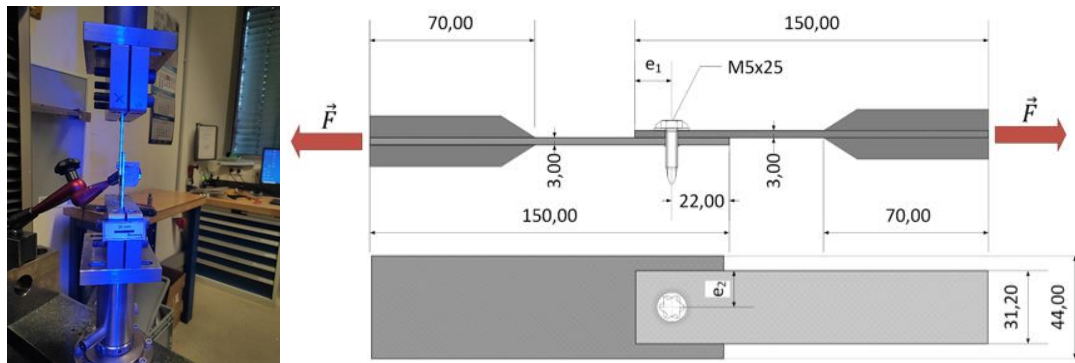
Test arrangement (left) and specimen (right) for tension testing
